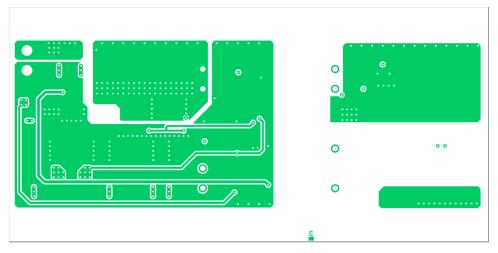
RDR-85SLR Mid-Layer 3 PCB Layout.
